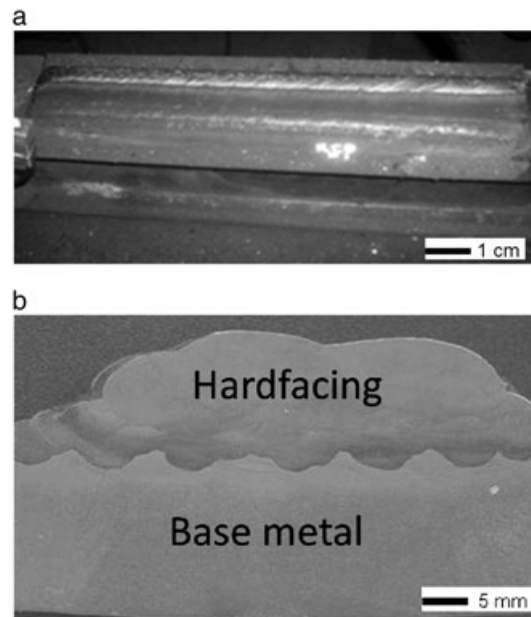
(a) A welded coupon and (b) its transversal sections.
